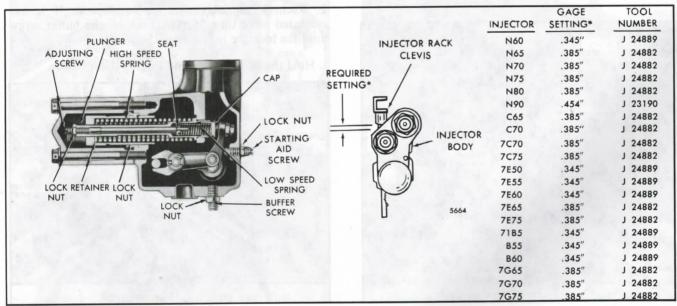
Adjusting Starting Aid Screw (Current Turbocharged Engines)
